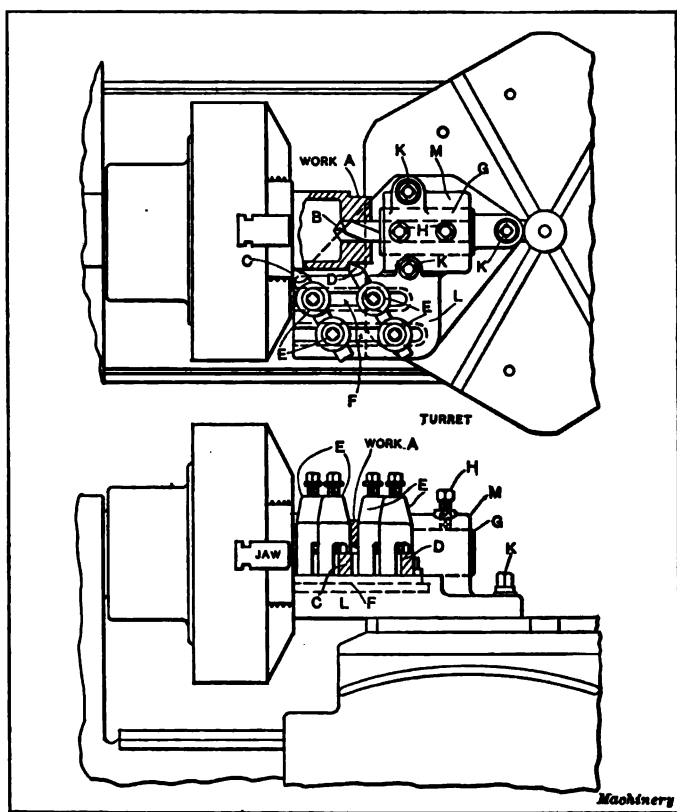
Multiple Tool-holder for the Turntable Type of Lathe
